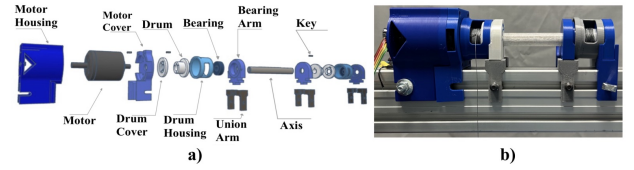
a) Schematic of disassembled mechanical structure; b) Image of the final mechanical structure.
